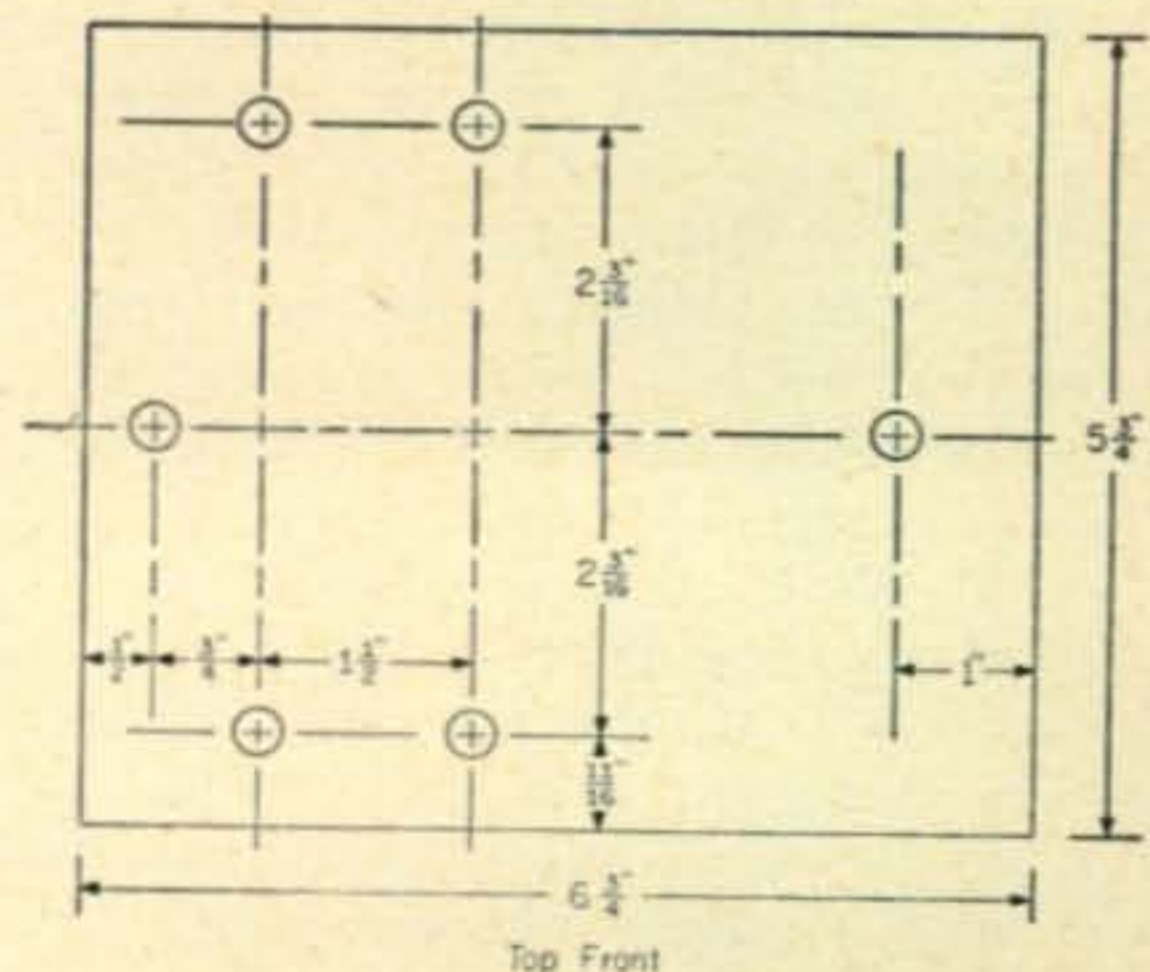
Dimensions for the transmitter mounting template used for the VW.
